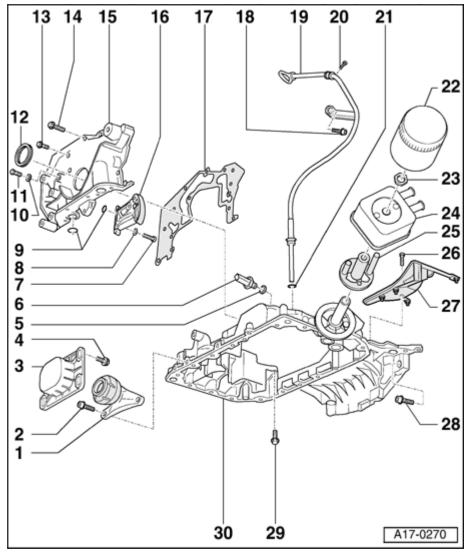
Lubrication System Components Remove/Install Components (Part II - Oil Pan (Upper Part), Oil Filter)
